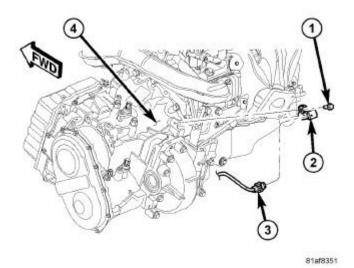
Identifying Camshaft/Crankshaft Position Sensor Connectors Courtesy of CHRYSLER LLC
